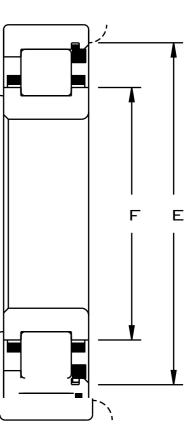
PHOTO SHOWS AN UNMOUNTED CYLINDRICAL Roller Bearing Assembly
